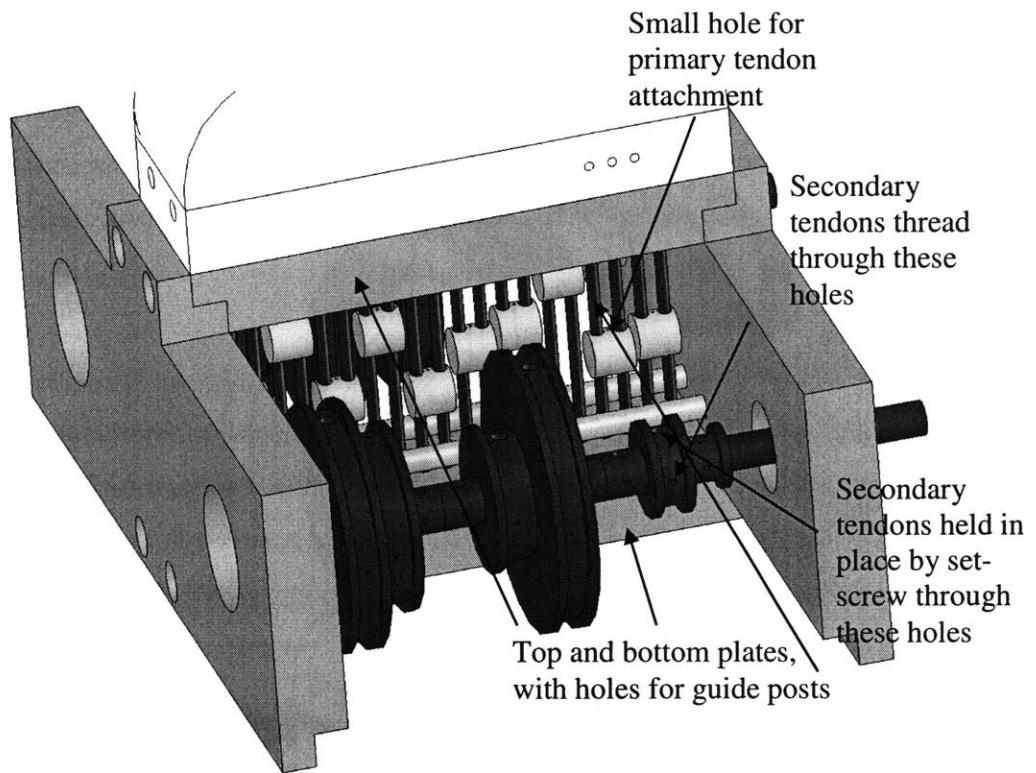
Close-up of final prototype base, showing sliding pulleys and adjustment mechanism.
